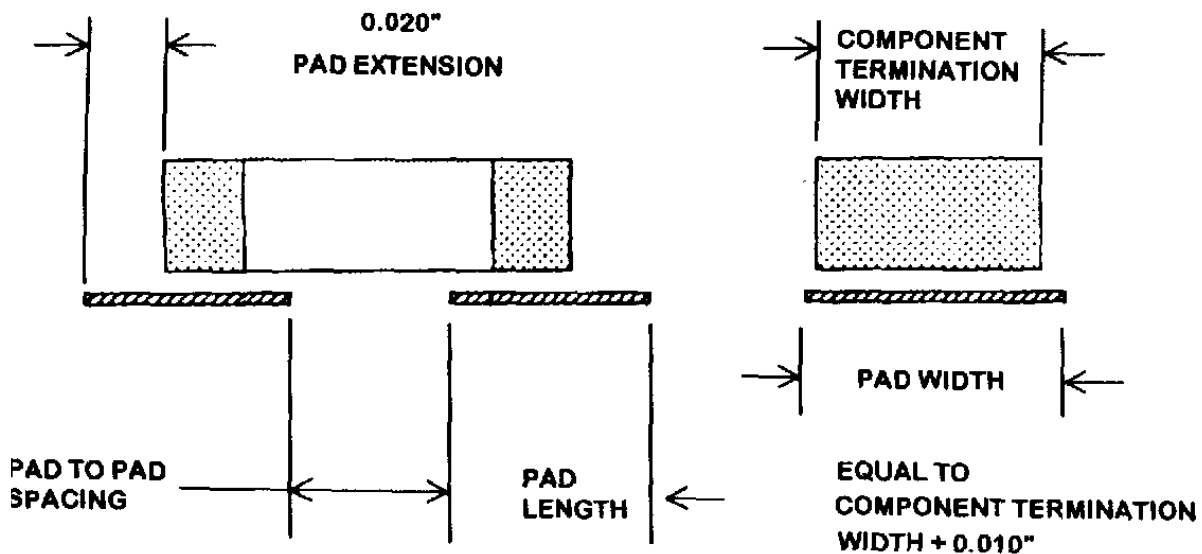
SOLDER PADS FOR 0603 AND 0805 CHIP COMPONENTS
